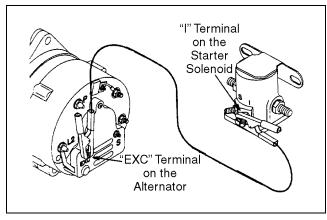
D-5. Jumper Wire to Alternator and Solenoid
